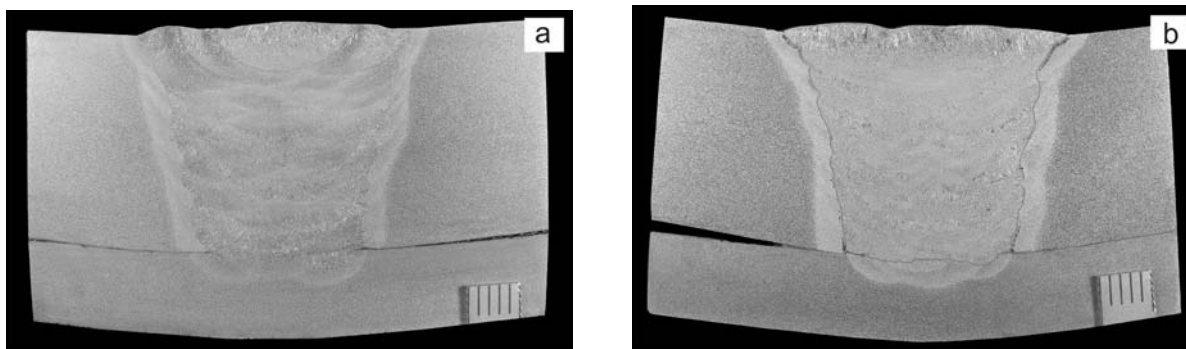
Macrostructures of weld deposits: a) without heat treatment, b) with heat treatment; etch. Adler.
